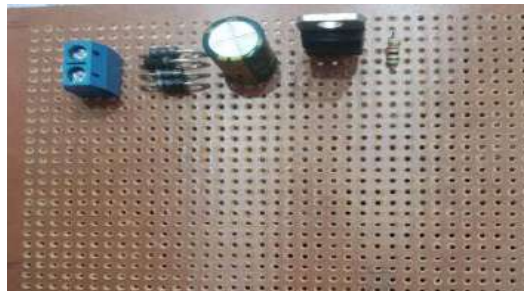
Assembling on PCB Sheet 01-03-2023
